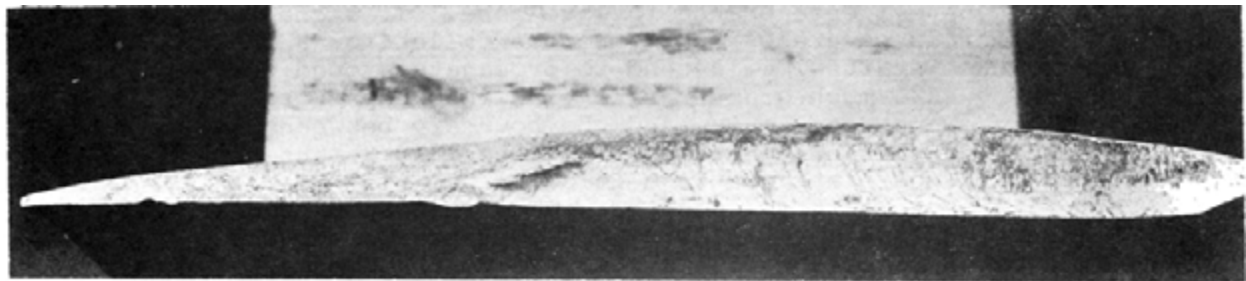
A-37 Fatigue fracture in aluminum alloy skin and in engine turbine wheel
